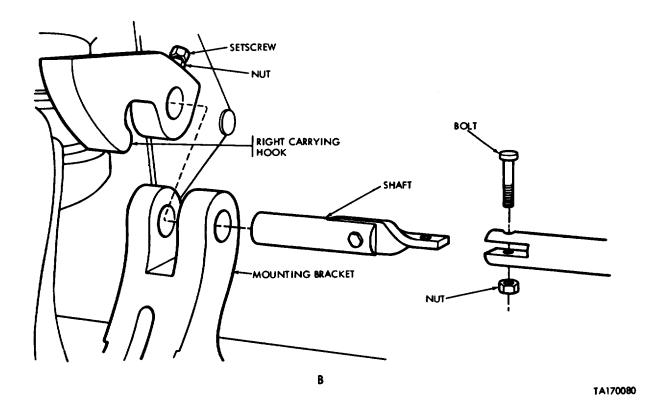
Removal or installation of carrying hooks and shafts (sheet 1 of 2).
